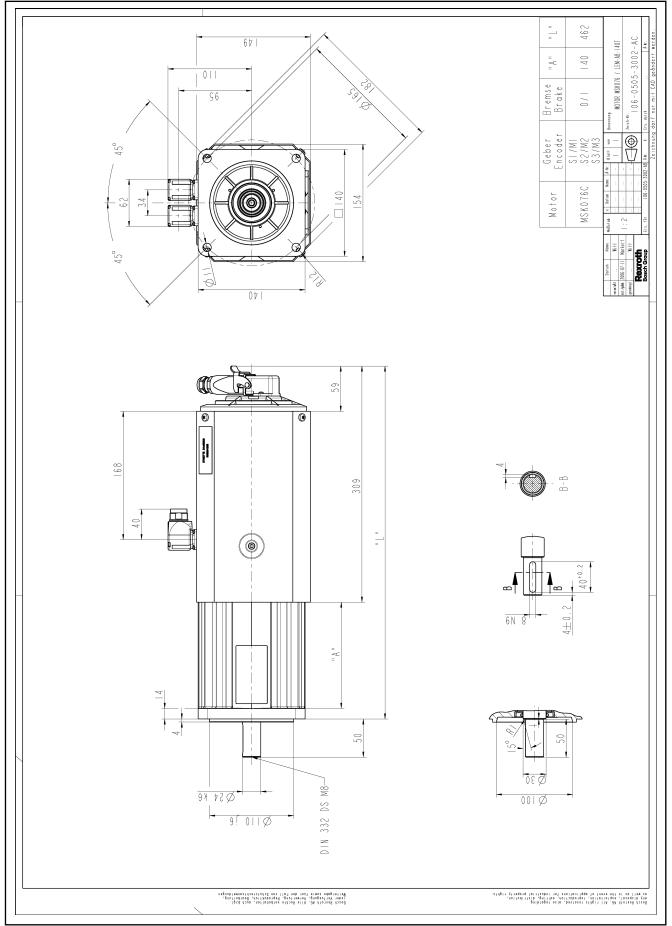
Dimension sheet MSK076 with axial fan unit
